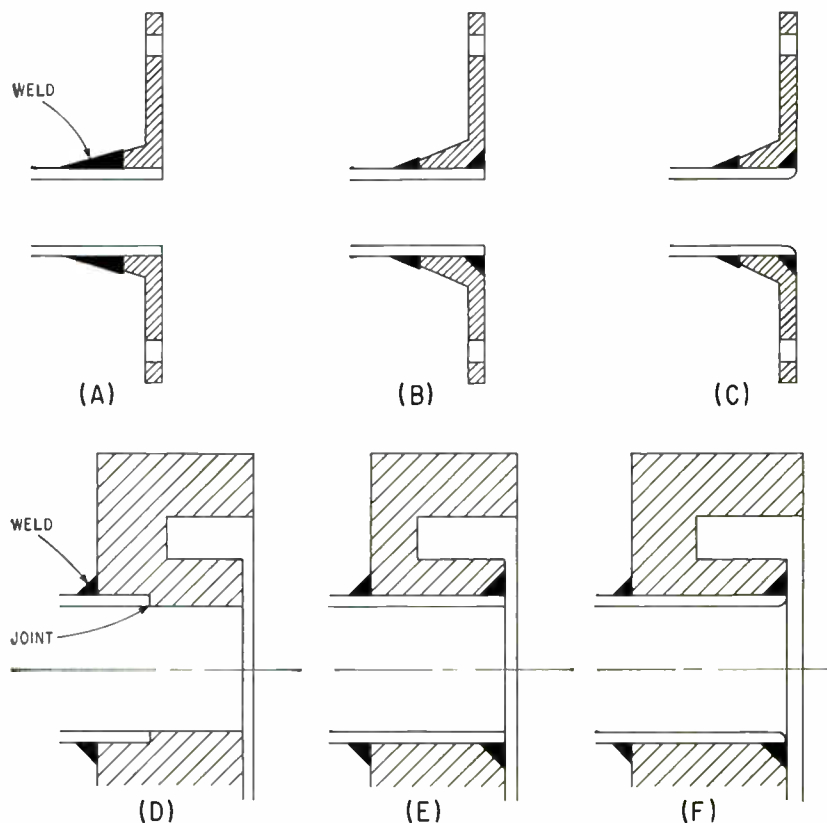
Heavy weld on cover flange (A) would avoid possibility of a short caused by welding on face (B), but (B) makes a better flange. Rounding corners (C) improves behavior. Joint in choke flange (D) could cause discontinuity that could result in arcing. Solution is to pass waveguide through flange (E) and round corners (F)
